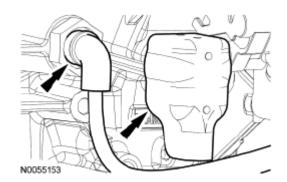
Locating Fuel Injector Electrical Connectors Courtesy of FORD MOTOR CO.
